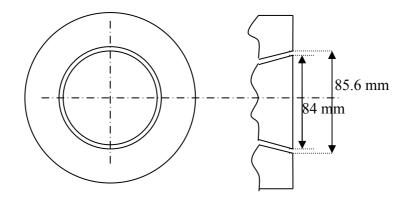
Illustration of the cake drainage section with geometrical dimensions
